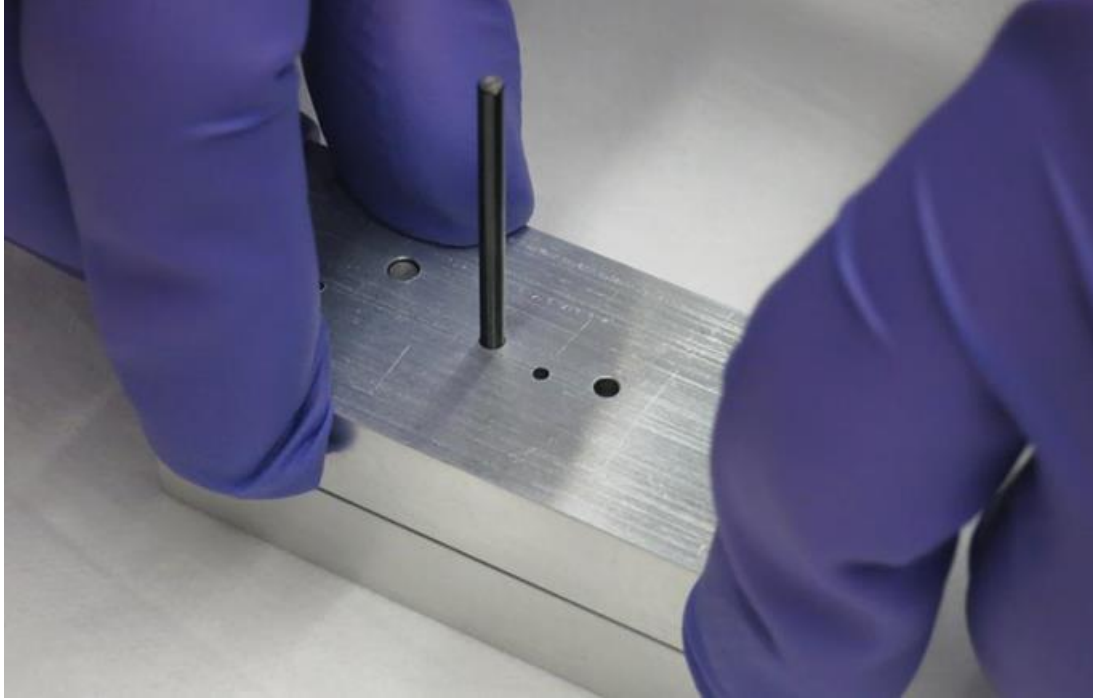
Marking indenter guide plate installed over specimen on support base plate. Punch is placed in one of the guide holes. Finger pressure produces a satisfactory gauge-mark indent.
